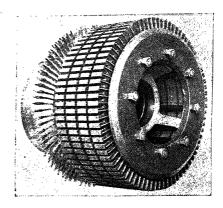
Completely Assembled Armature and Commutator Ready for Winding (Rear View) Courtesy of General Electric Company
